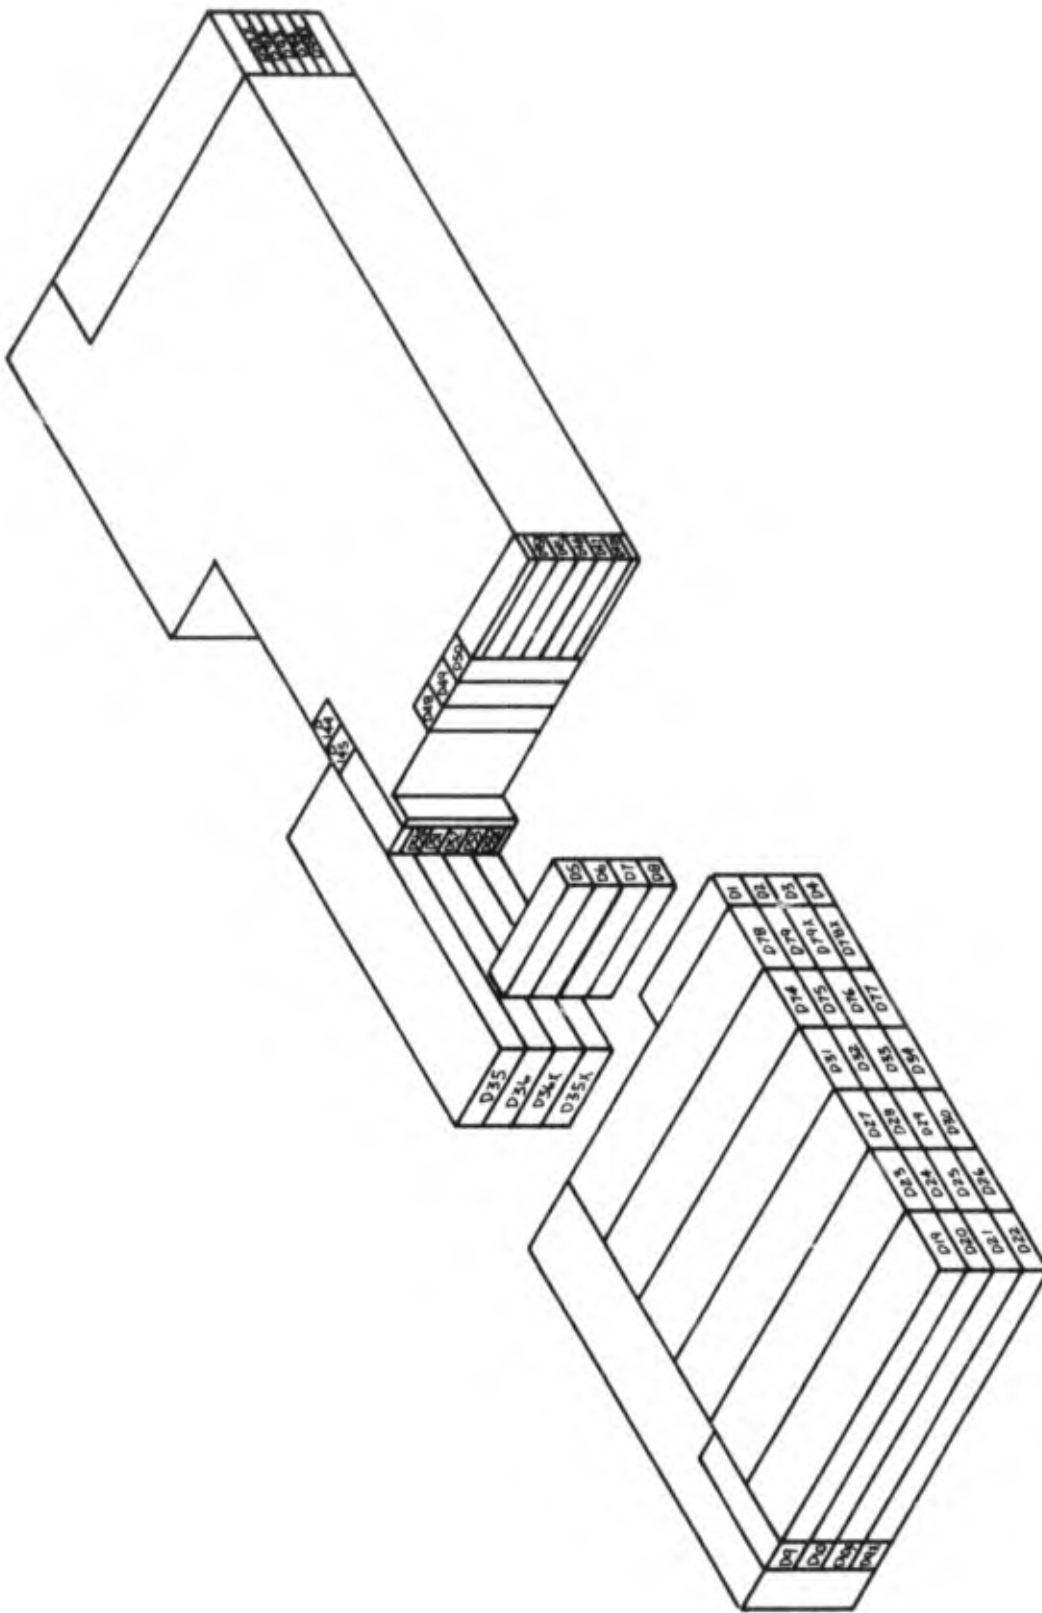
300M Billet Cutting Diagram, Heat No. 3951531, Billet P
